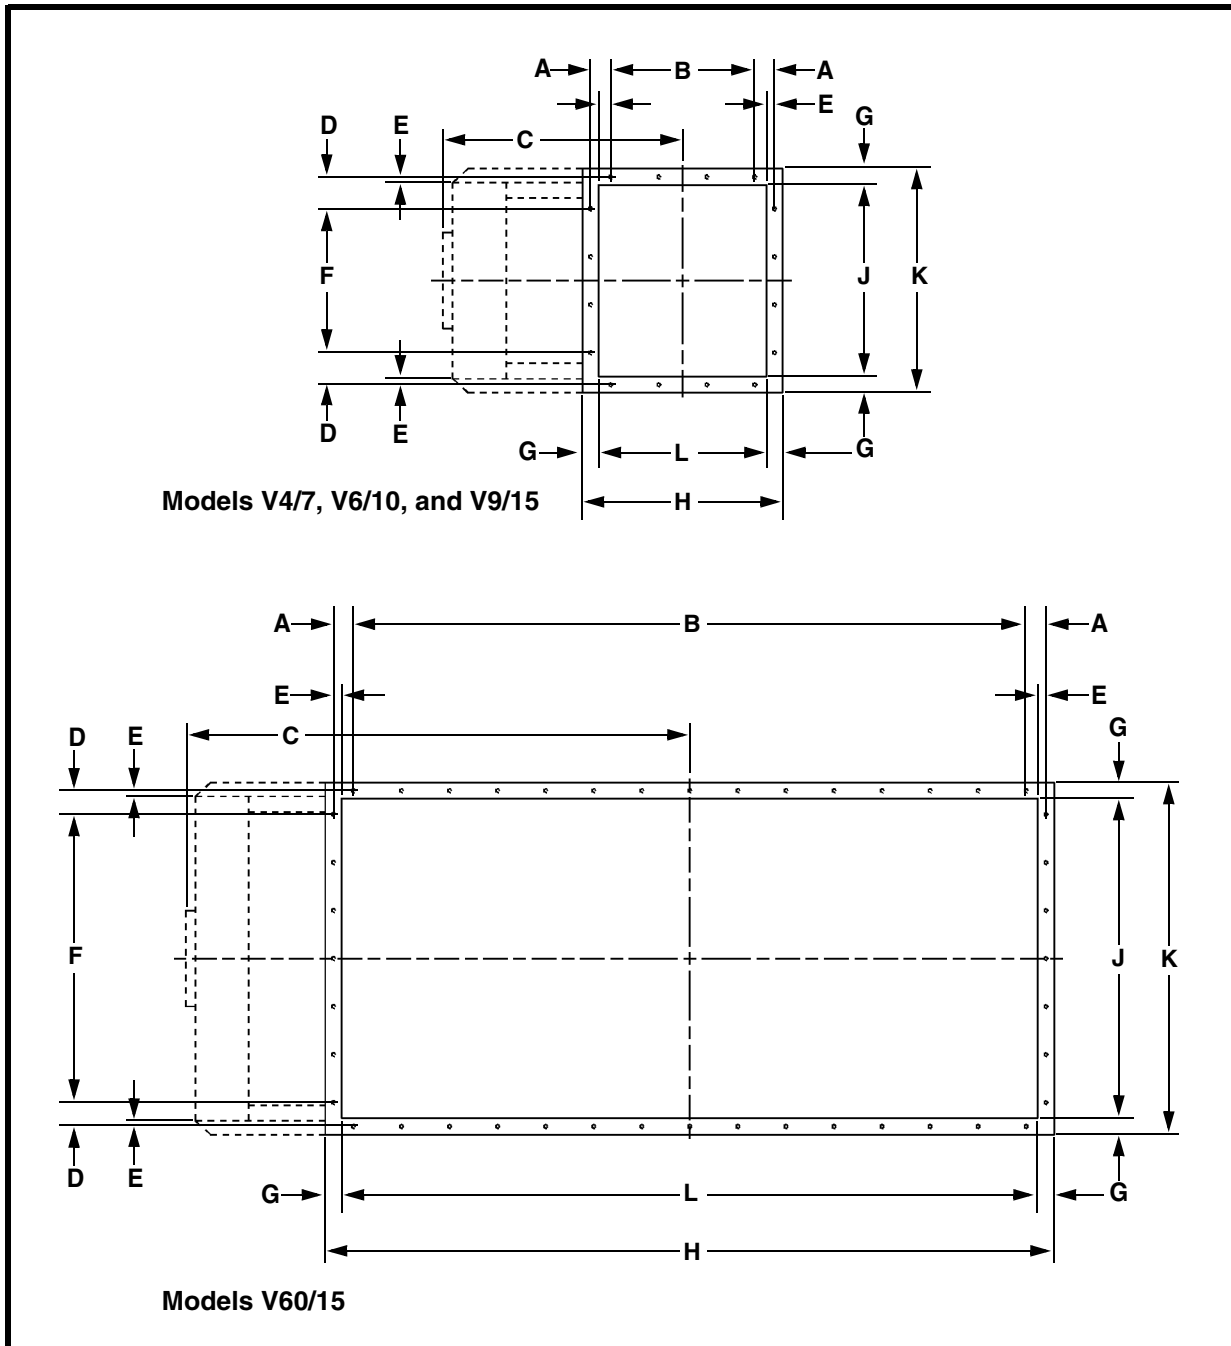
Aperture and Mounting Flange Dimensions for Martin® Air Cleaner Units
